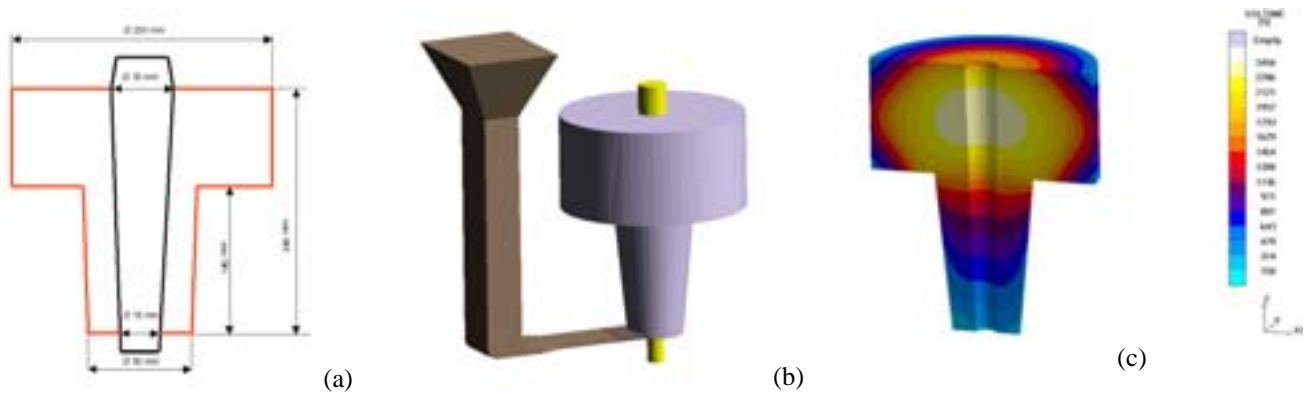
(a) Test casting dimensions. (b) Test casting isometric view with gating system. (c) Simulation result of solidification time of base alloy.
